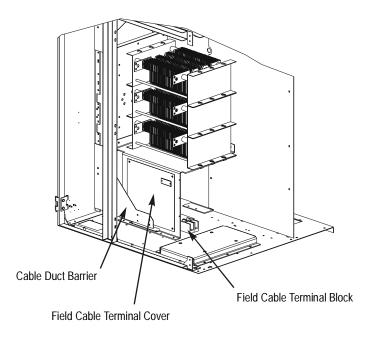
Access to Field Cable Terminal Block (Cutaway view - Power cell doors and side panel not shown)
